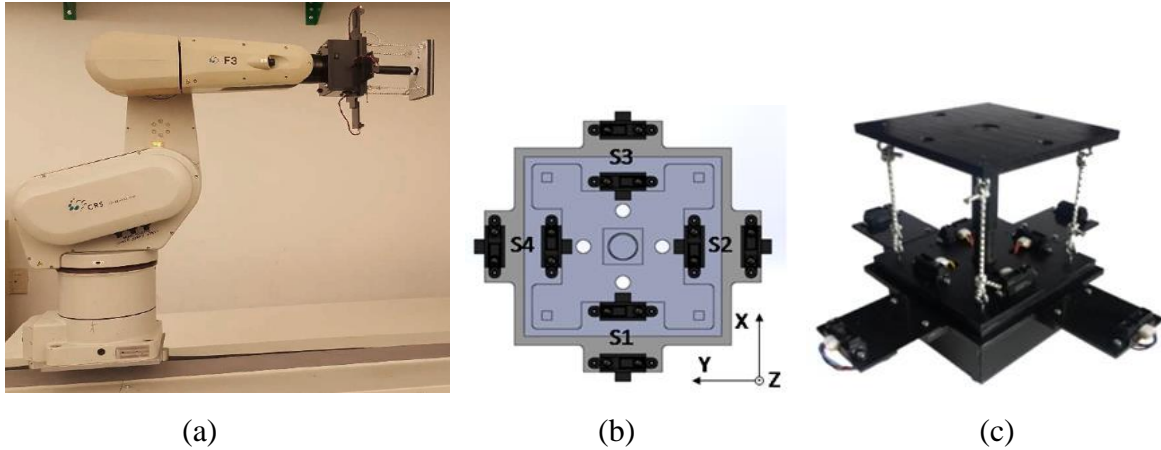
a) Compliant wrist mounted on the CRS-F3 manipulator, b) internal and external sensors arrangement, c) compliant wrist assembly.
